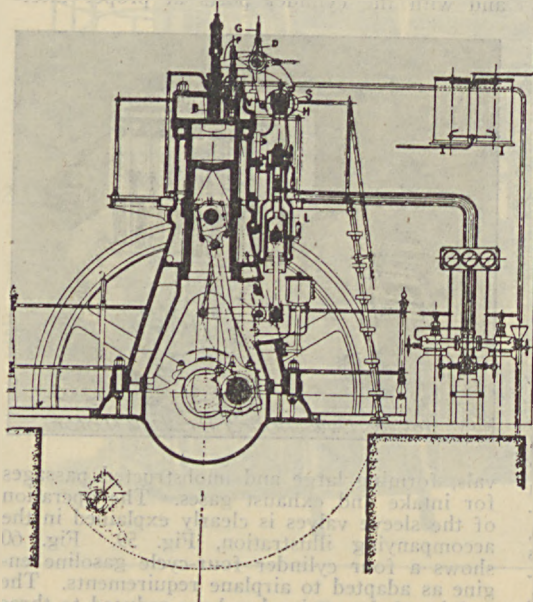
Transverse section of M. A. N. Diesel Engine.
